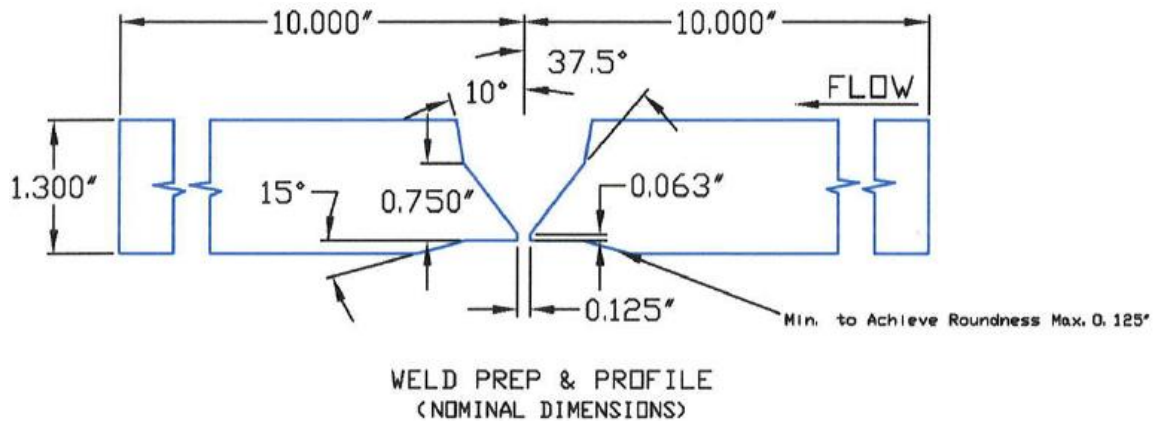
Specimen cross-sectional view, including the weld profile. Dimensions are in inches. This view does not show the saw-cut flaw.
